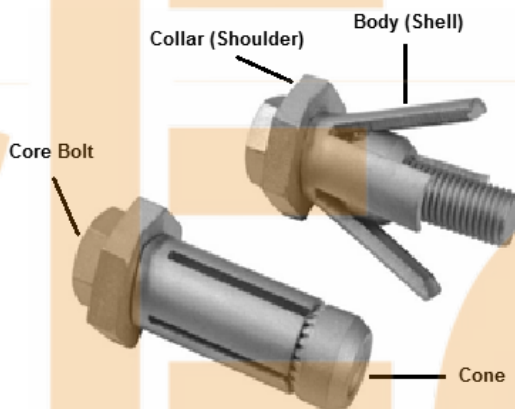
TYPICAL BOX BOLT® TYPE C BLIND FASTENER
